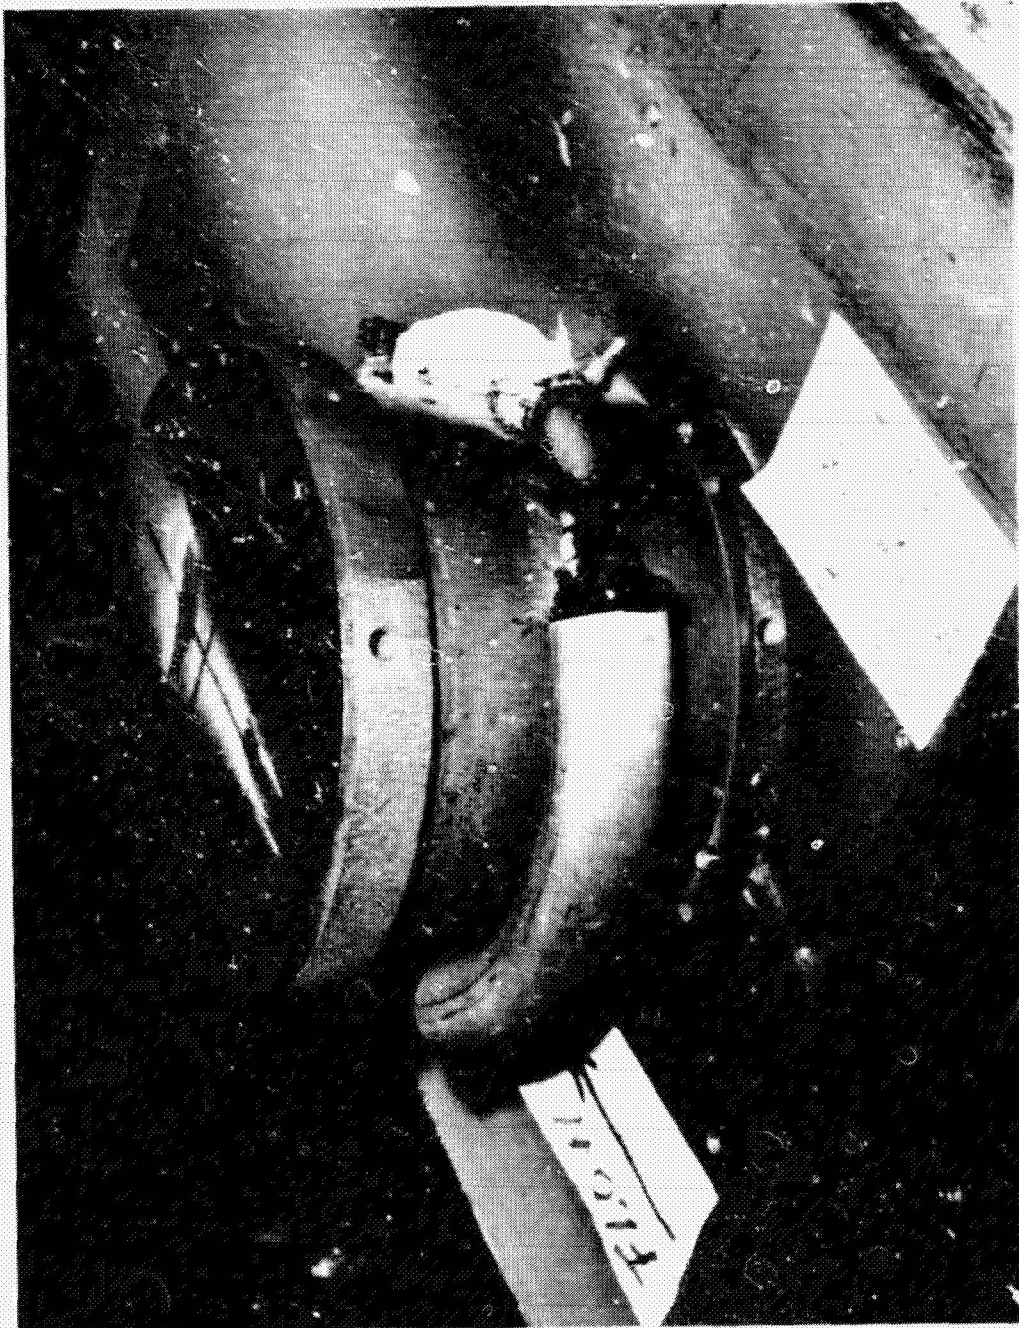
Front/Side View of Model After Test Showing the Exposed Cable Which was Wrapped with 3M Heat Barrier Tape
